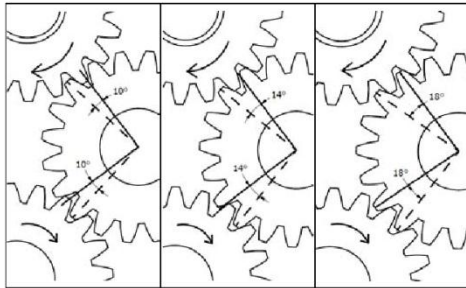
Gear train with one idler gear in 10°, 14° and 18° angular positions where double pair tooth contact takes place between meshing gears.
